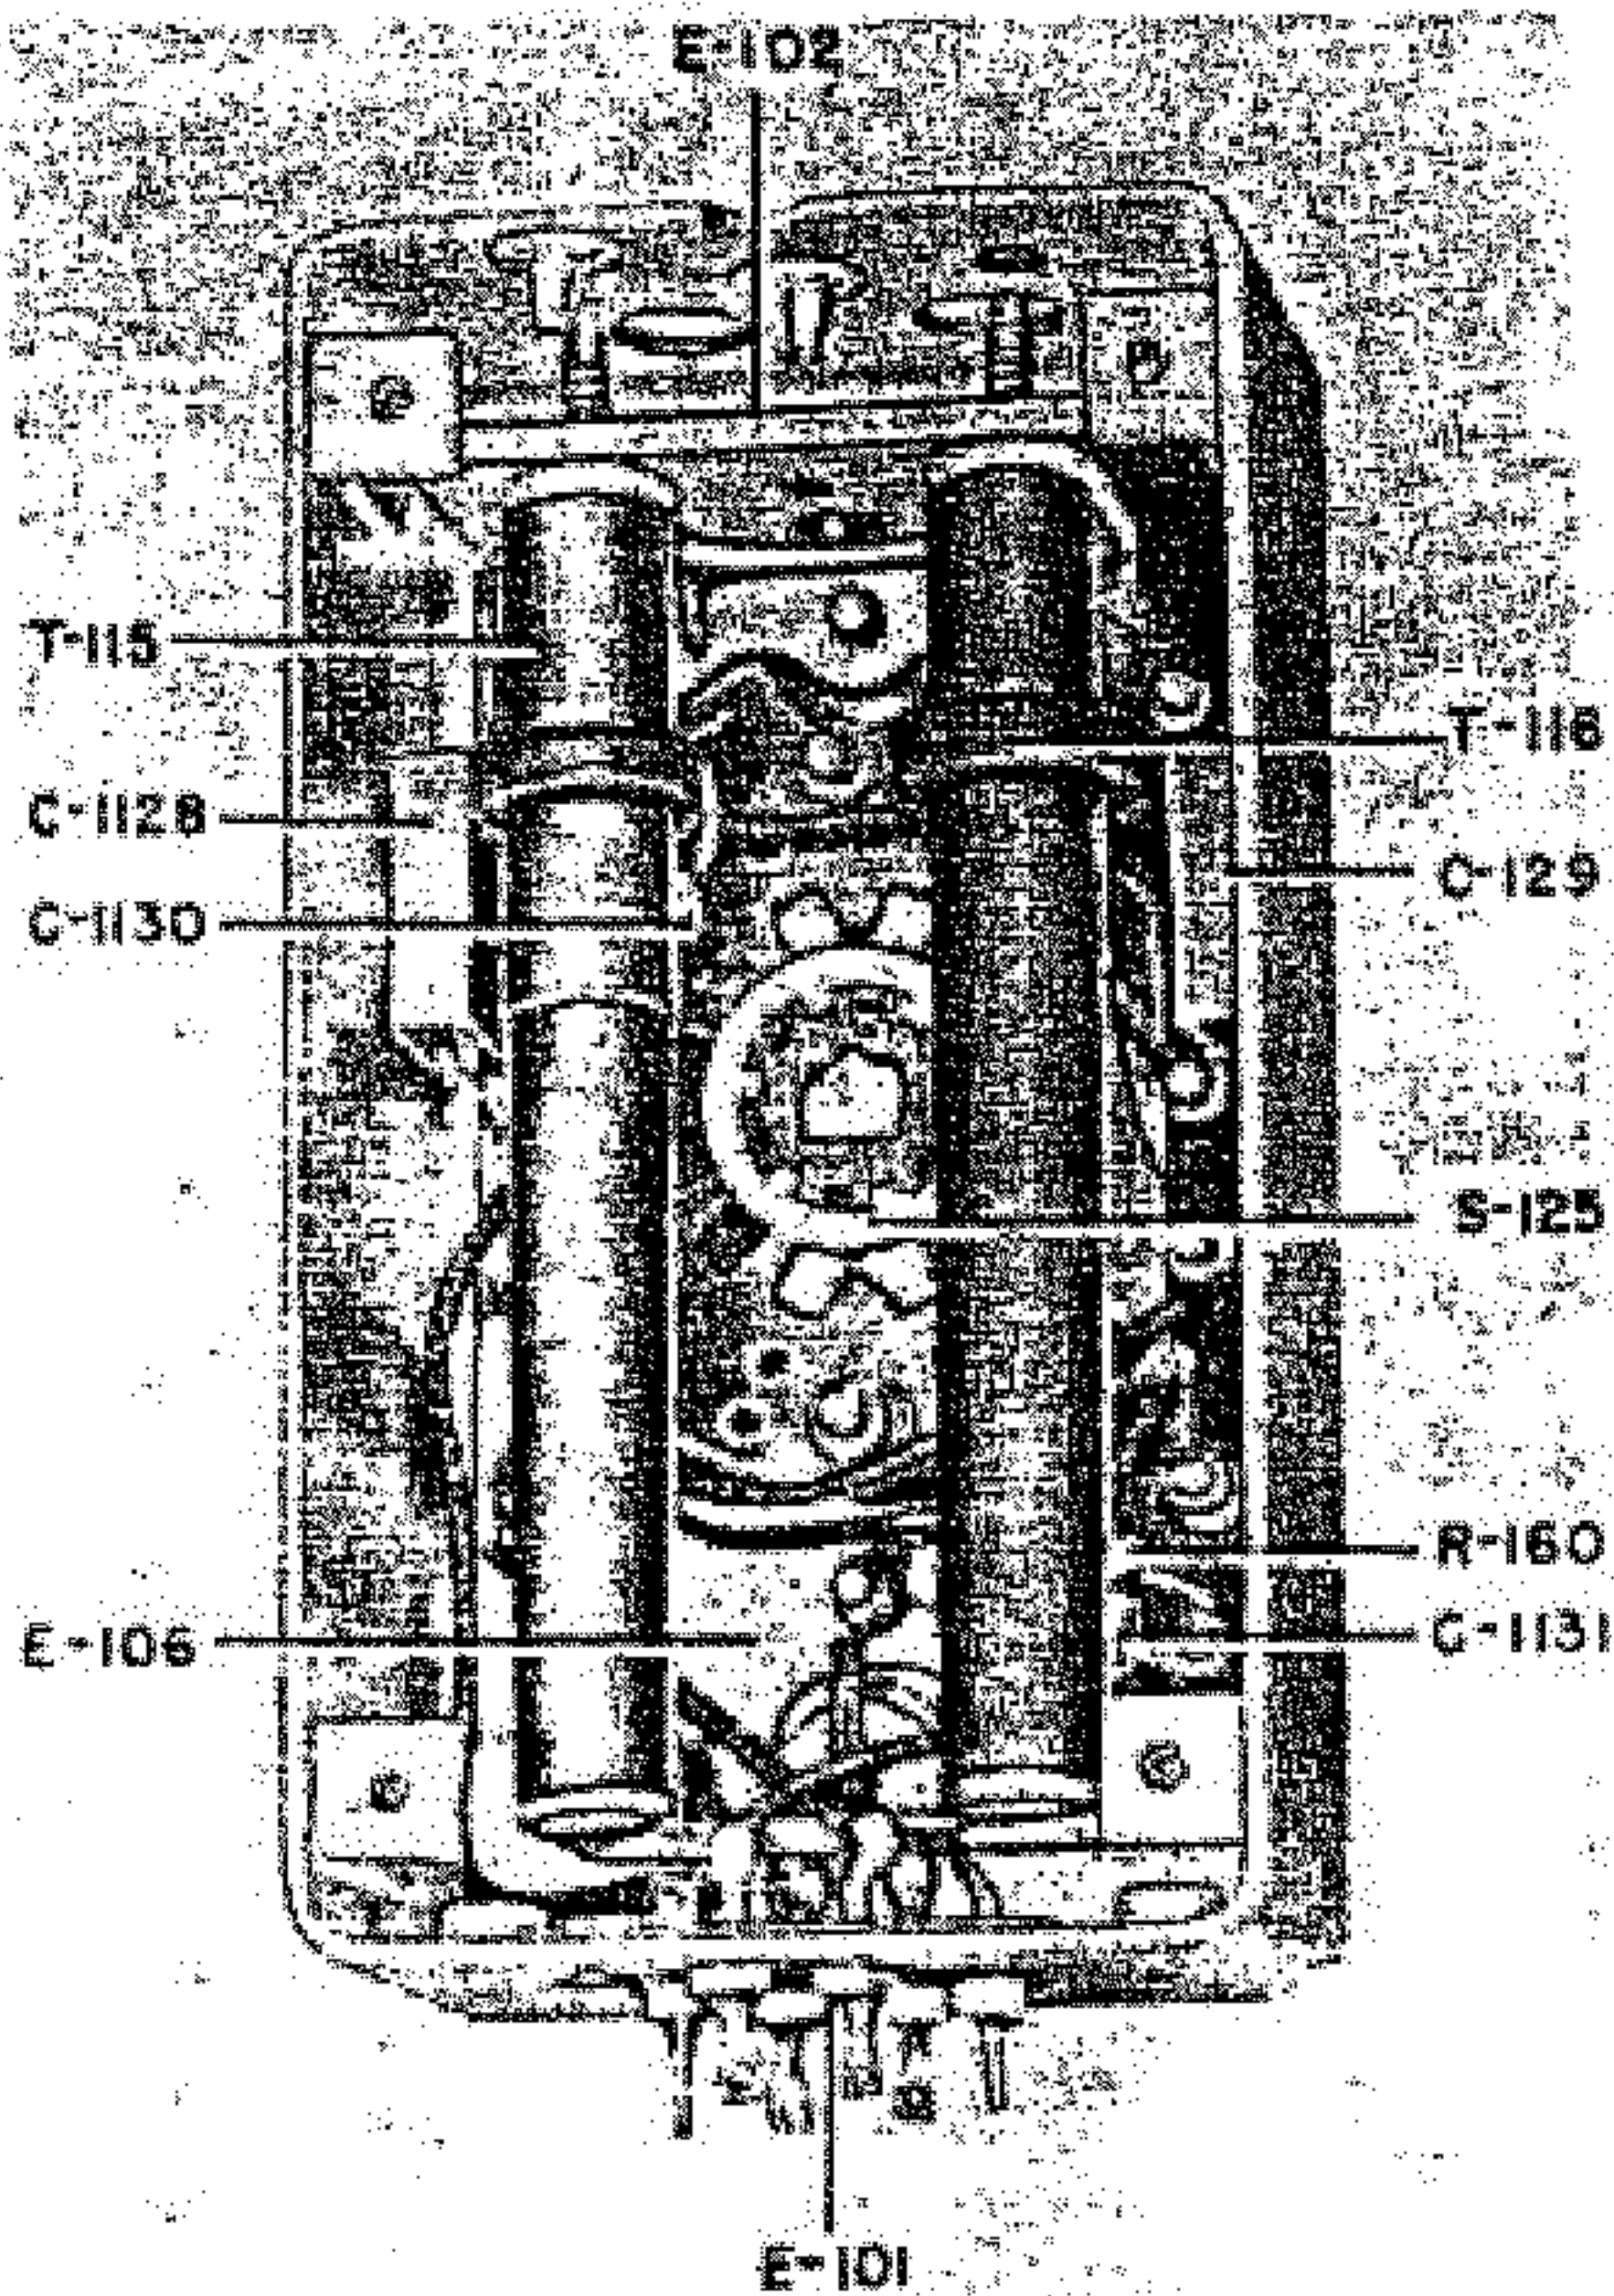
Beat-Frequency-Oscillator Transformer Assembly T-104, Cover Removed
